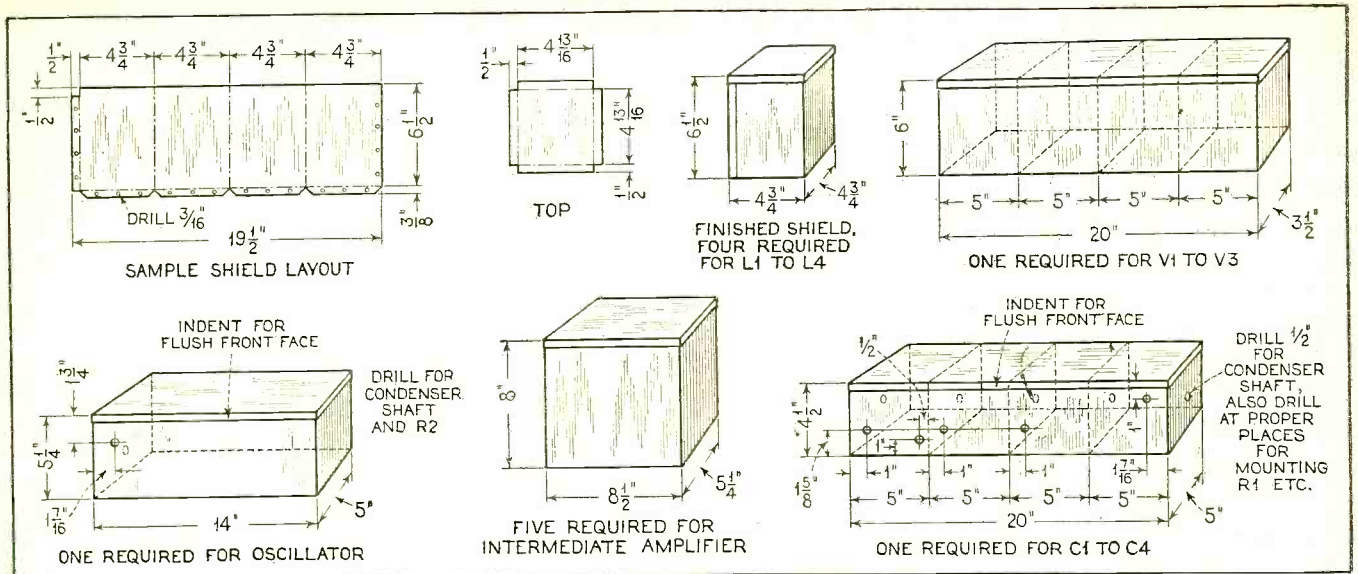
DETAILS OF SHIELD CONSTRUCTION
